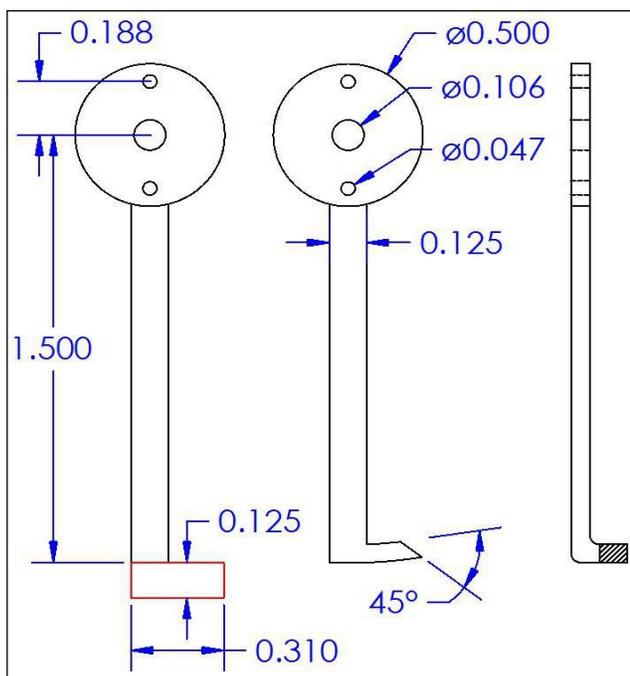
Pallet arm construction drawing. Material is 1/16" O-1 flat stock. The front view on the left shows the arm before the tab (shown in red), is bent 90 degrees, the front view in the center shows the arm after the tab is bent.
